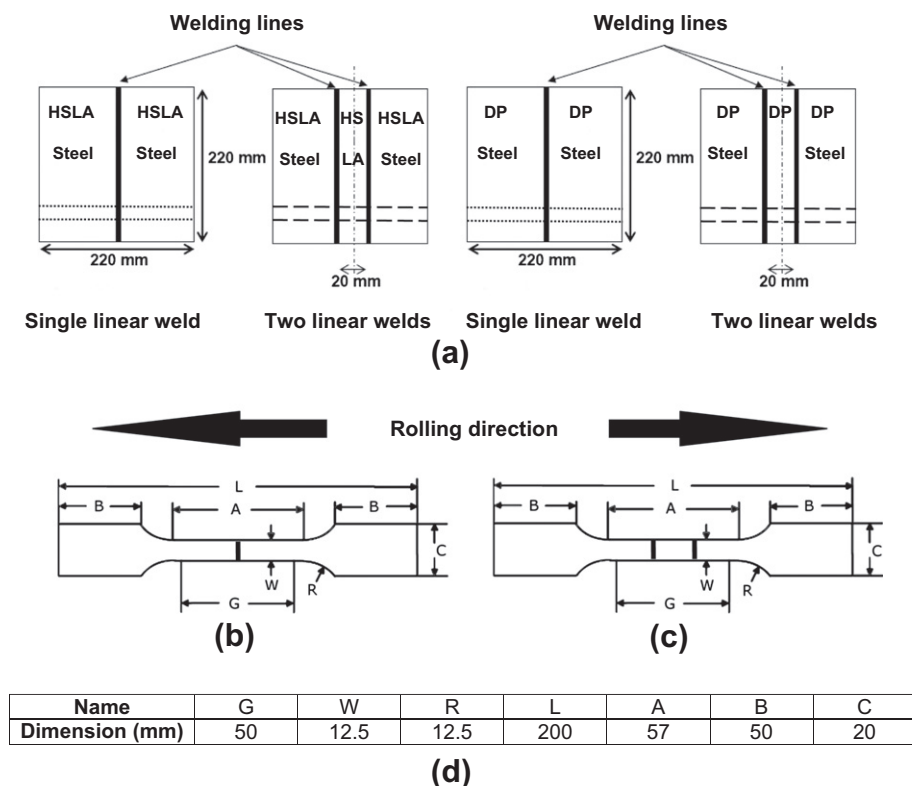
Geometry and dimensions of work pieces and test specimens, (a) work pieces to be welded using a 6 kW fiber laser, (b) tensile and fatigue test samples sectioned from the single linear weld indicated by the short-dashed lines at (a), (c) tensile and fatigue test samples cut from the multiple linear weld indicated by the long-dashed lines at (a), and (d) a table of the specimen dimensions.
